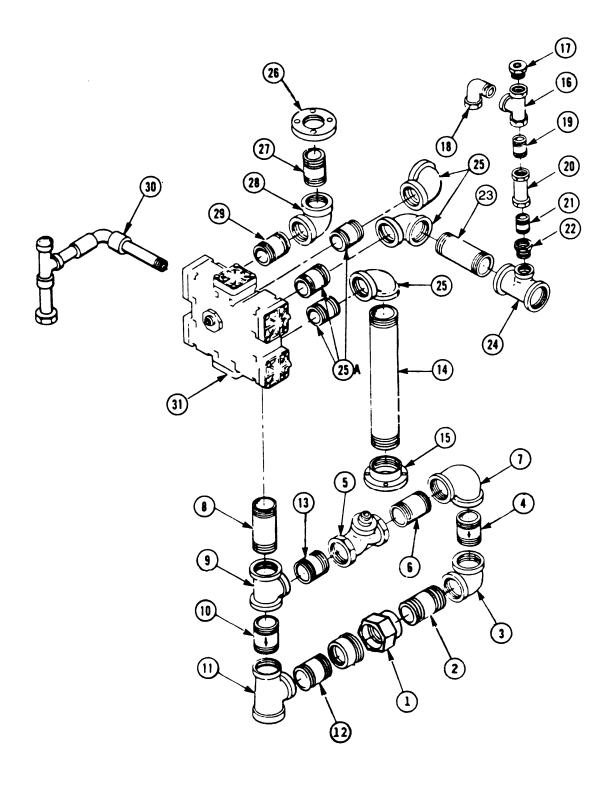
Multimedia Filter Control Valve Piping Assembly
